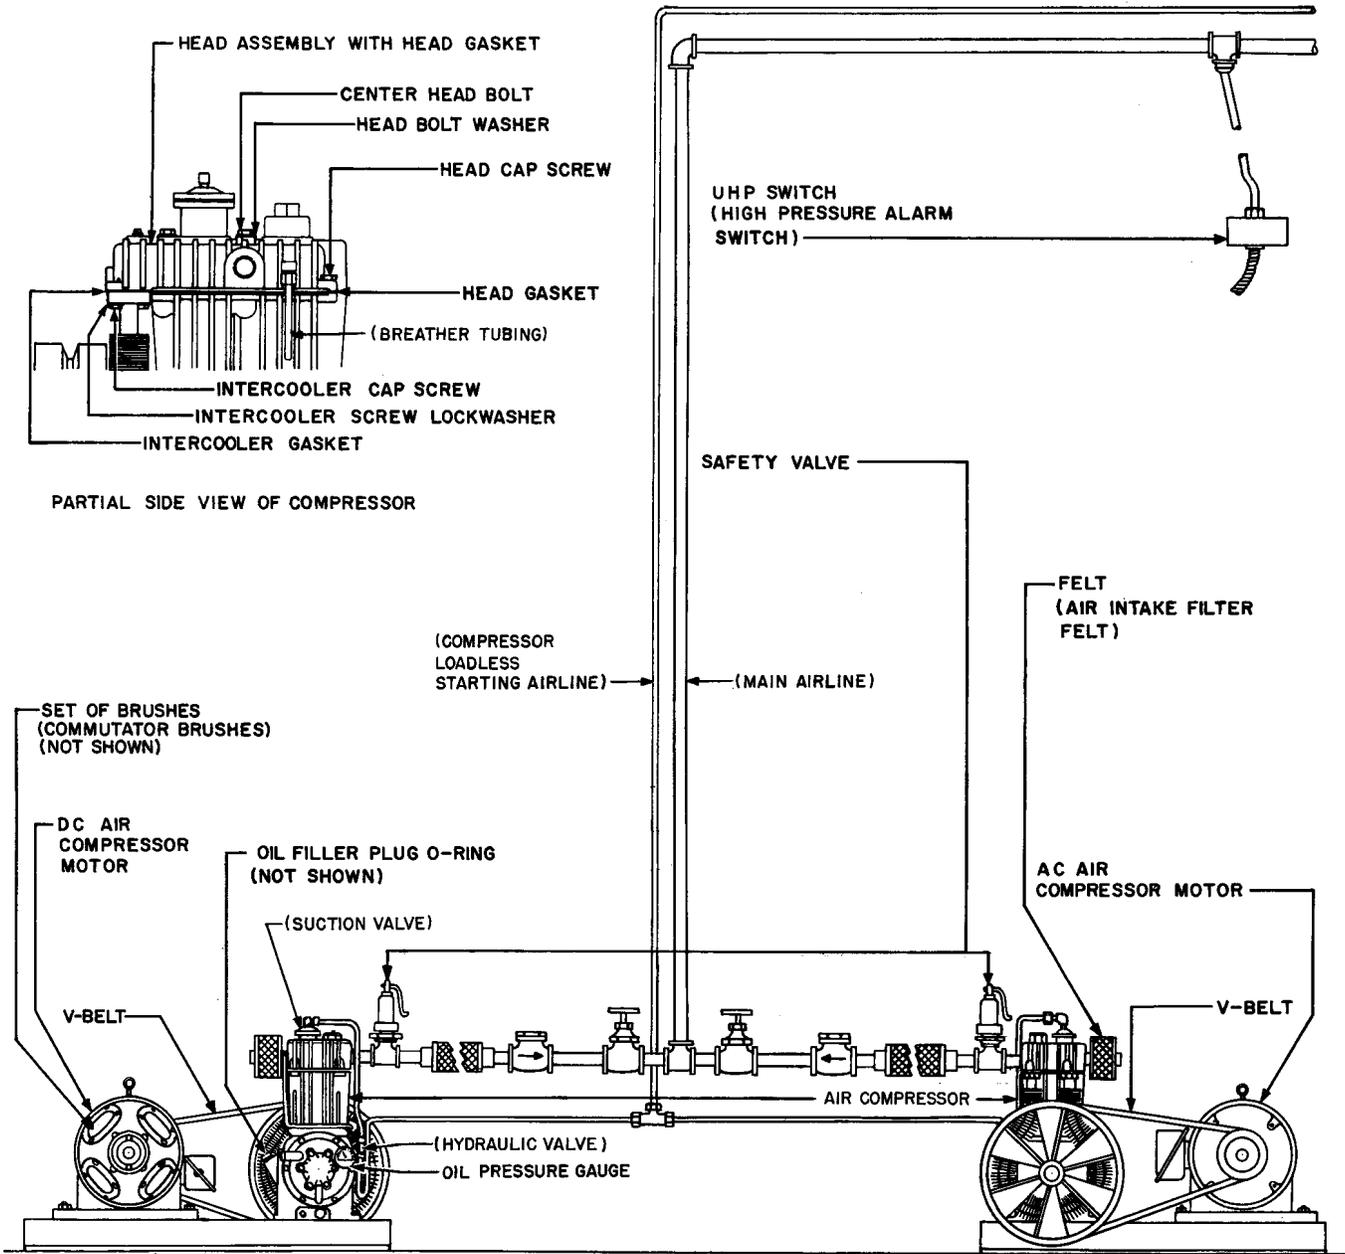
Typical Air-Starting Equipment — AC and DC Motor Air Compressors and High Pressure Alarm Switch (KS-15777, L51 Air-Starting Equipment Shown)
